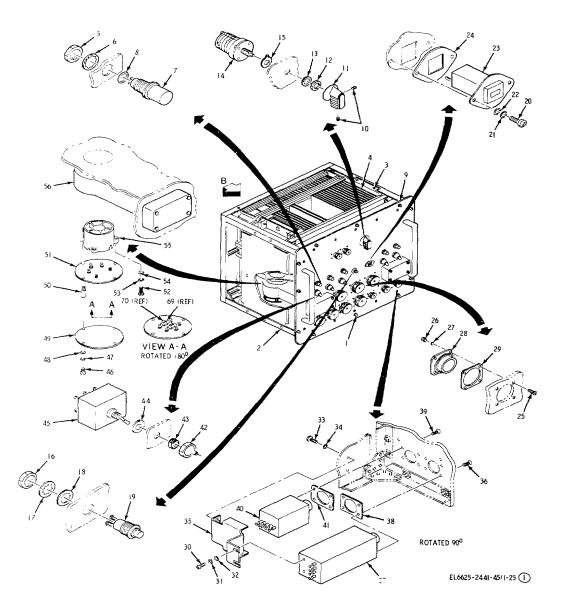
(1). Signal Conditioning Unit TS-2913/ASM-386, exploded view (part 1 of 3)
